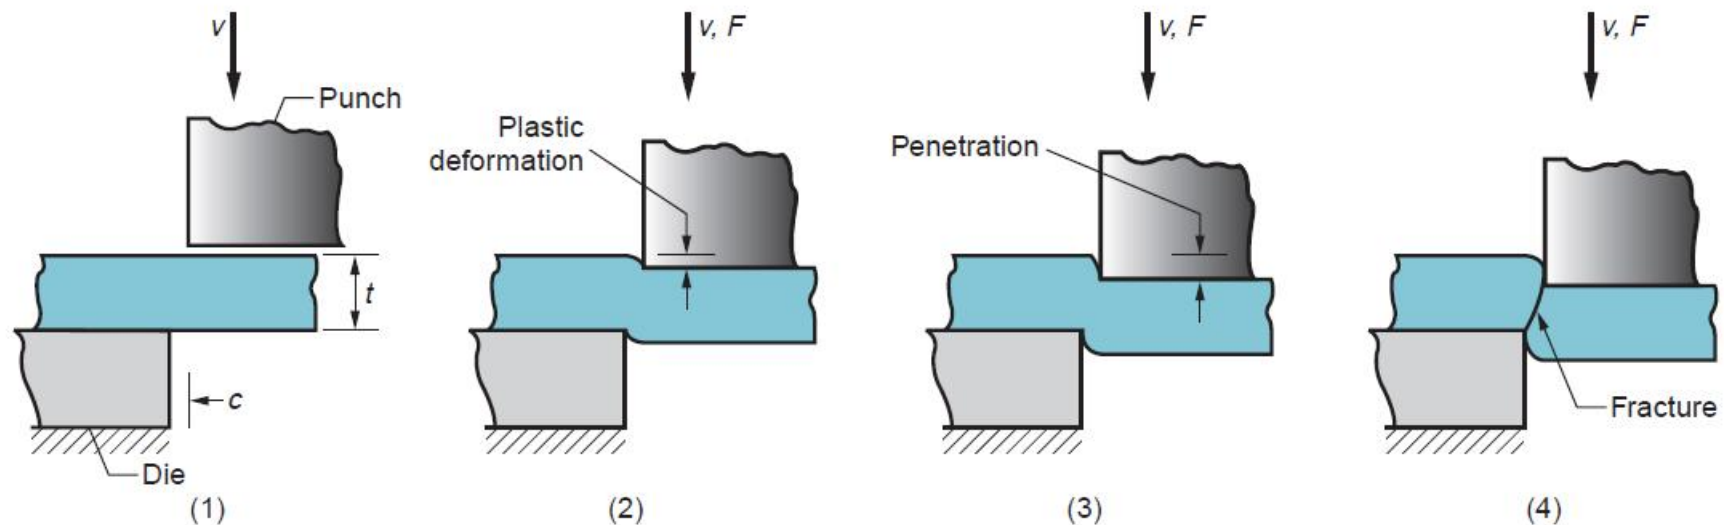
Shearing of sheet metal between two cutting edges: (1) just before the punch contacts work; (2) punch begins to push into work, causing plastic deformation; (3) punch compresses and penetrates into work causing a smooth cut surface; and (4) fracture is initiated at the opposing cutting edges that separate the sheet. Symbols  $v$  and  $F$  indicate motion and applied force, respectively,  $t$  = stock thickness,  $c$  = clearance.
